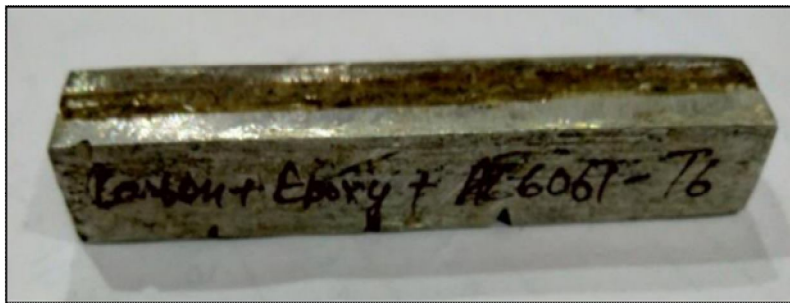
Izod Specimen Comprising Carbon Steel SAE 1042, Epoxy, and Aluminium 6061-T6
